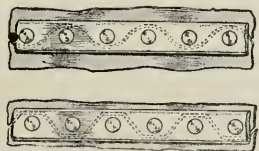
BUTT JOINT WITH A SINGLE ROW OF RIVETS
